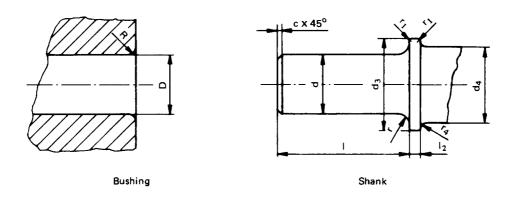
Light rivet snap shanks and chuck-bushings, parallel
